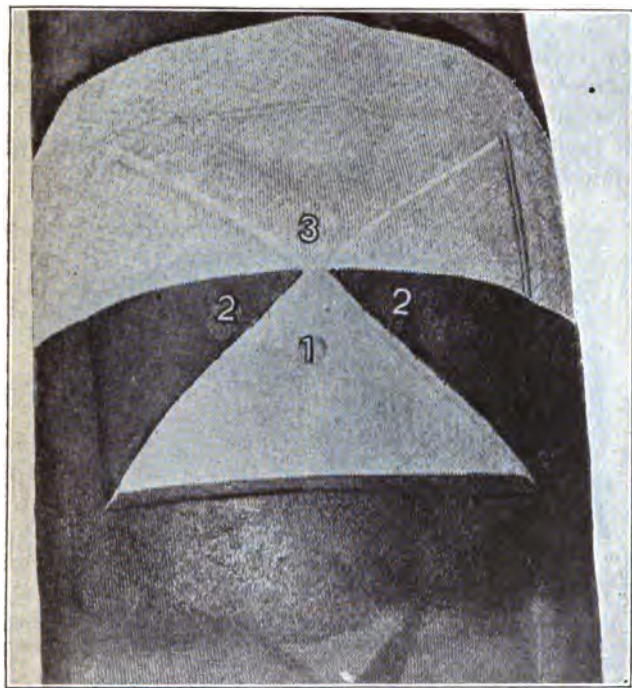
Building bias-cut section. Replace fabric with fabric. Fabric blocks are applied and the laybacks brought down. Reinforced.
